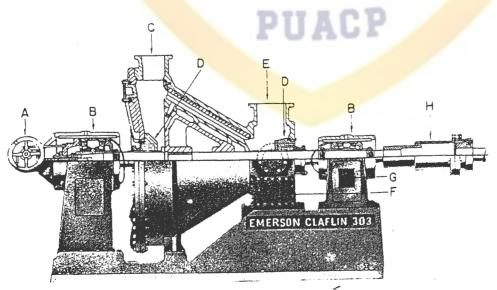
Emerson Claffin refiner. (A) Plug adjustment mechanism. (B) bearing assemblies, (C) stock outlet, (D) packing boxes, (E) stock inlet, (F) cleanout, (G) oil-mist lubrication, (H) coupling, coupling. (Emerson Mfg. Co.)
